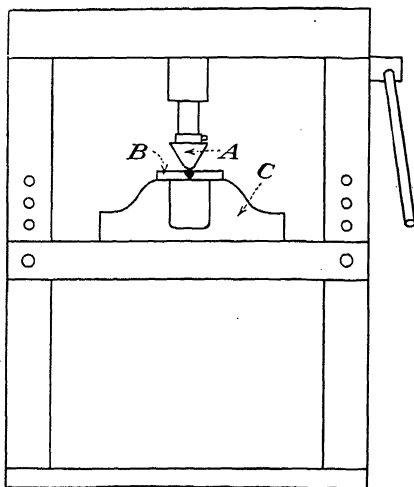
Hydraulic press used to test coupons. A. Heart-shaped piece of steel fastened to ram with setscrew. B. Weld coupon. C. Testing block.
